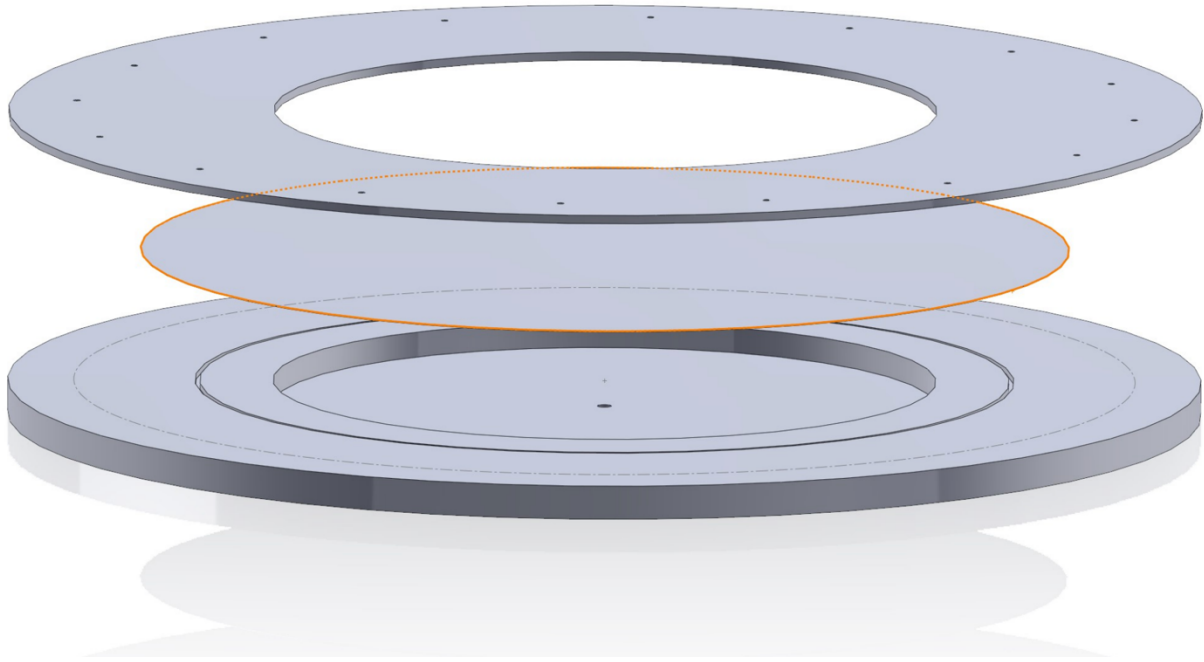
Assembly of vacuum test chamber with (top to bottom) aluminum clamp, Kevlar disk, and aluminum base plate
